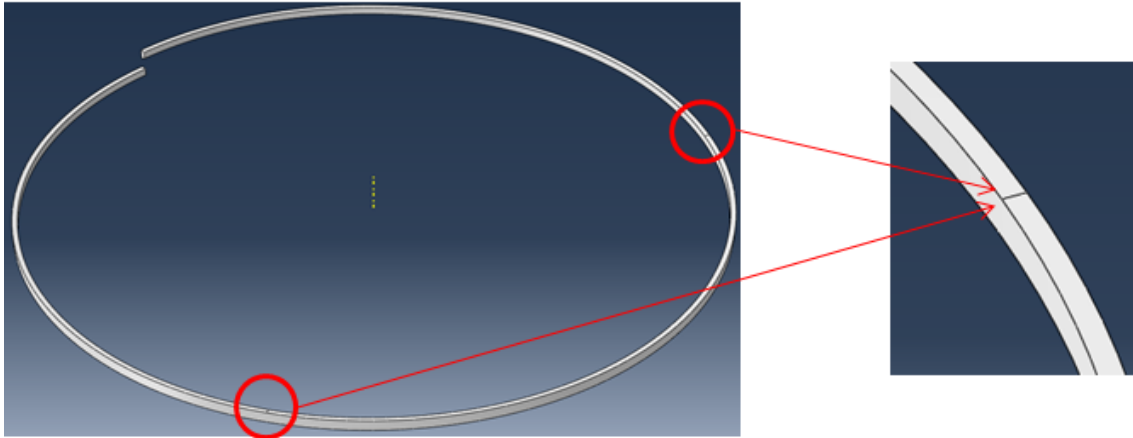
360° revolved single thread displaying surface divisions in the thread face.
